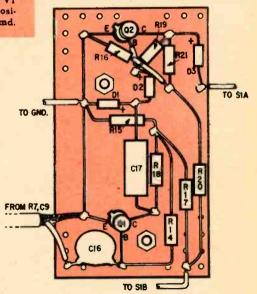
Squelch board. Install all parts on board before mounting it on main chassis. Board fits in lower right corner of chassis as shown in Fig. 1. Watch the heat when soldering diodes D1.D2.
